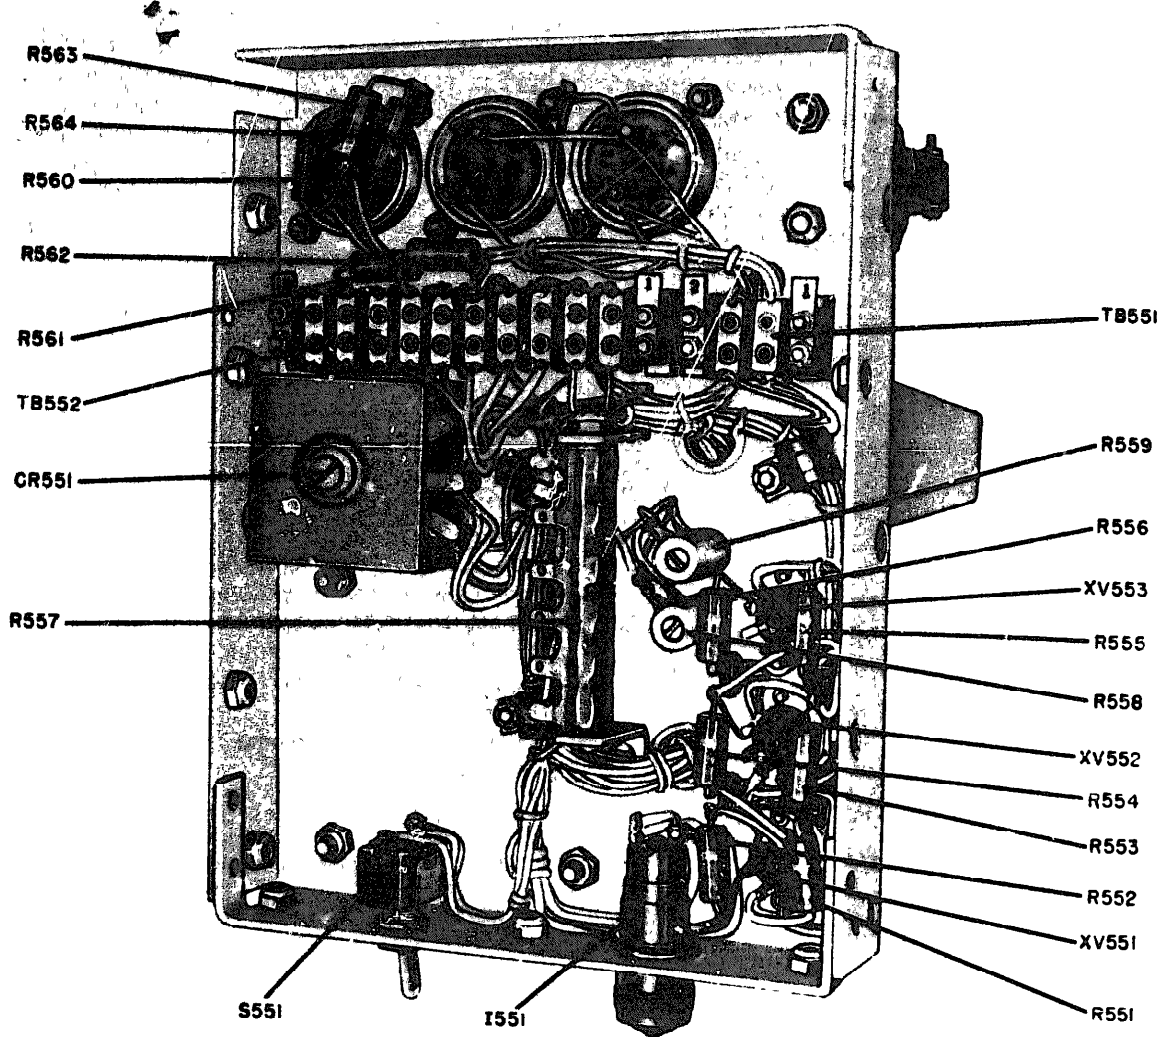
Power supply bracket assembly, bottom view, circuit element location diagram.
